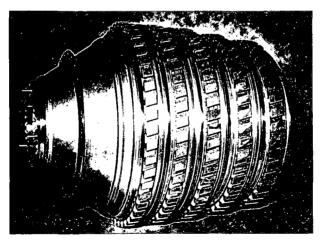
All-welded HP compressor drum in IMI 685 alloy for Rolls-Royce/Turbomeca Adour engine. (Courtesy Rolls-Royce Limited)
